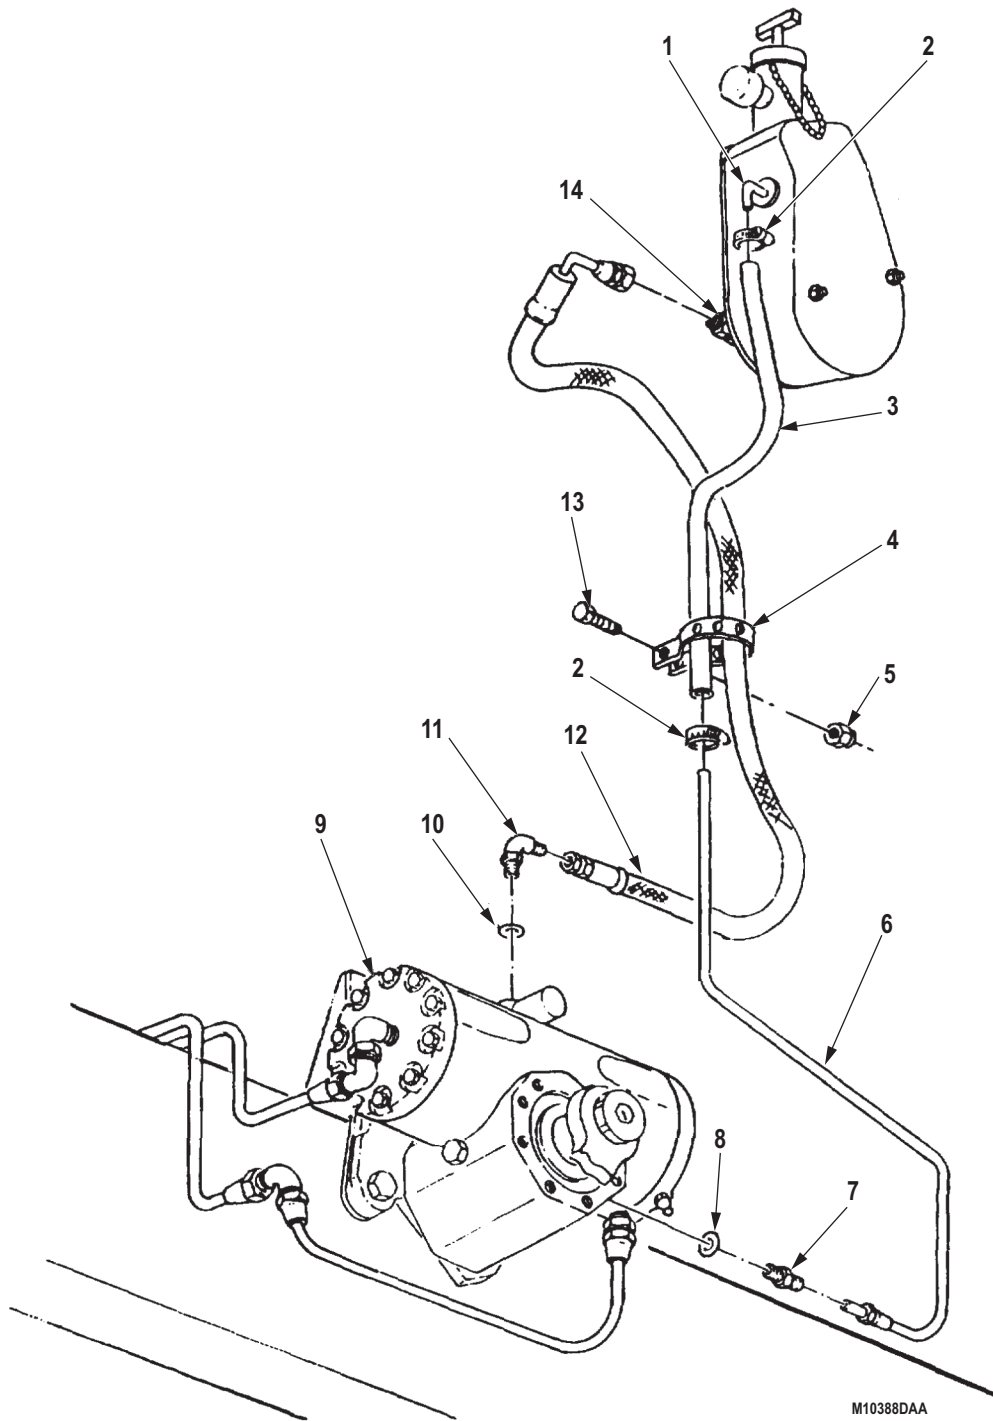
Power Steering Pump Pressure and Return Hose Removal.
